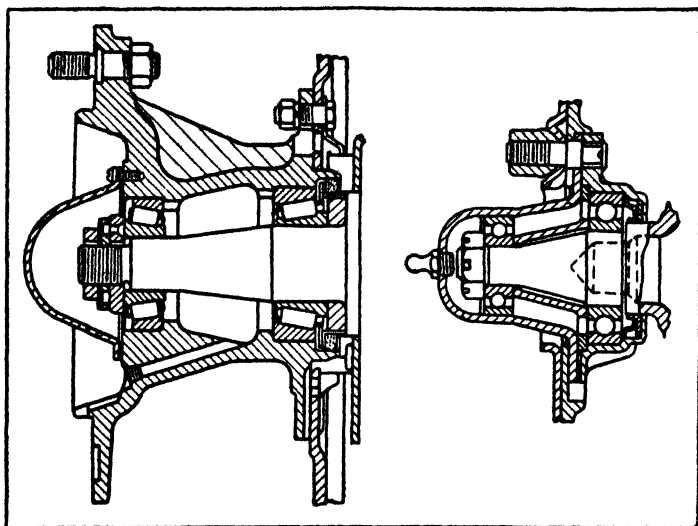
(left).—FRONT-WHEEL HUB WITH TAPER ROLLER BEARINGS.
